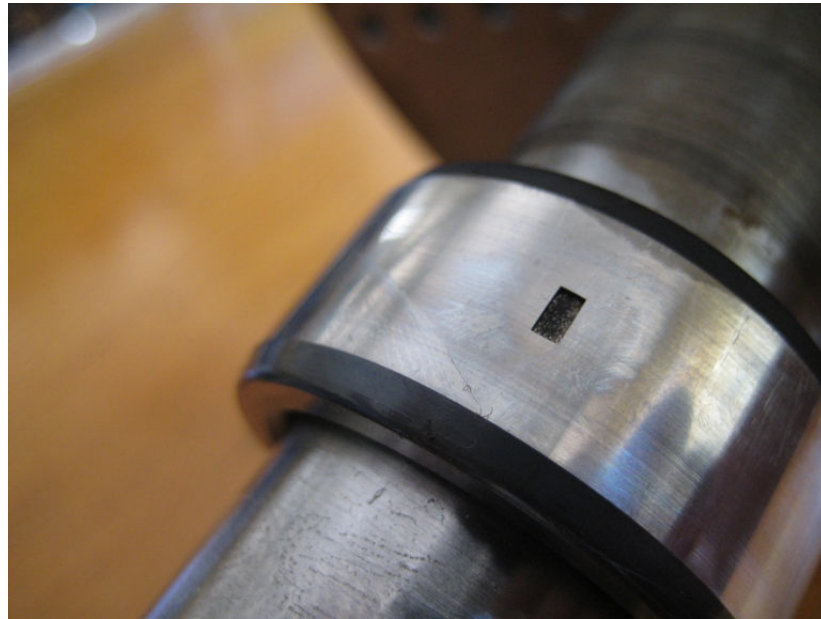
Inner race fault in the cylindrical roller bearing.
